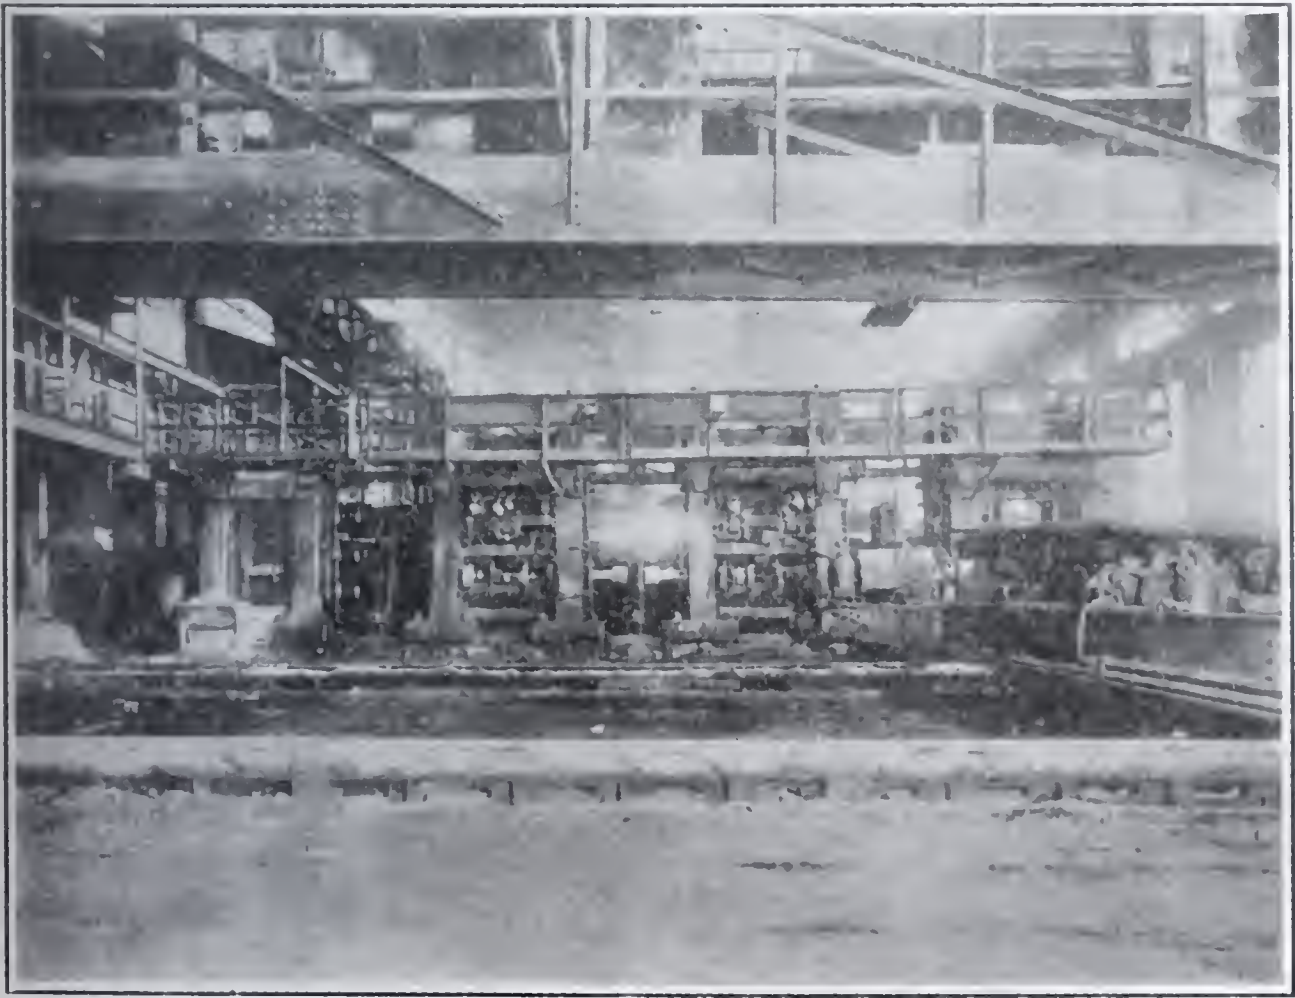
Equipment on 28-Inch, Three-High, Three-Stand, Structural Mill.
